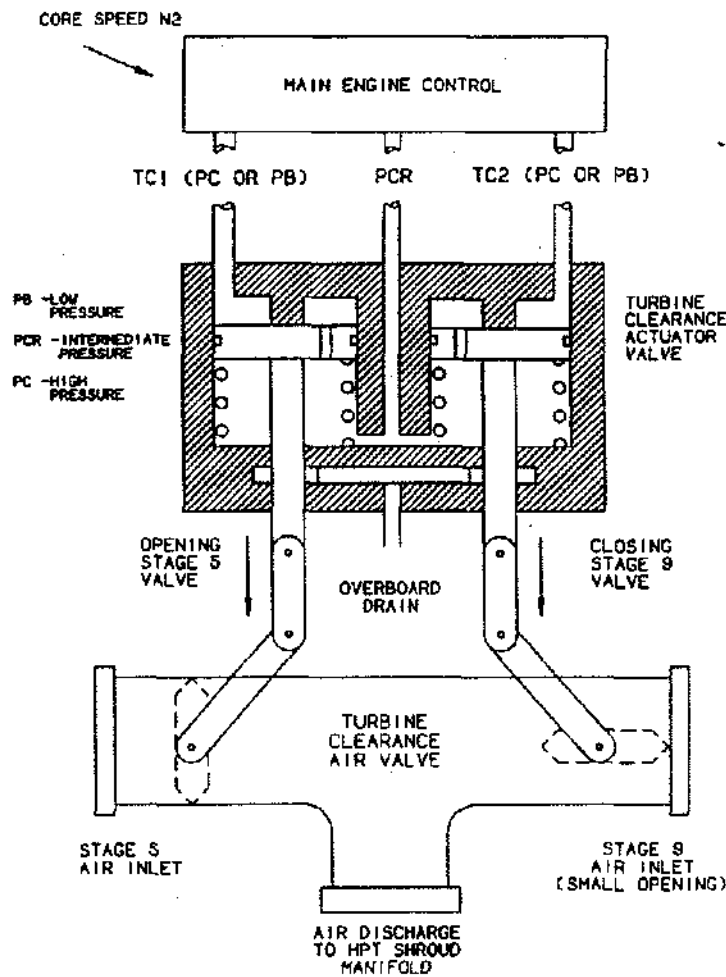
CFM56-2/3 Turbine Clearance Control Valve Operation
